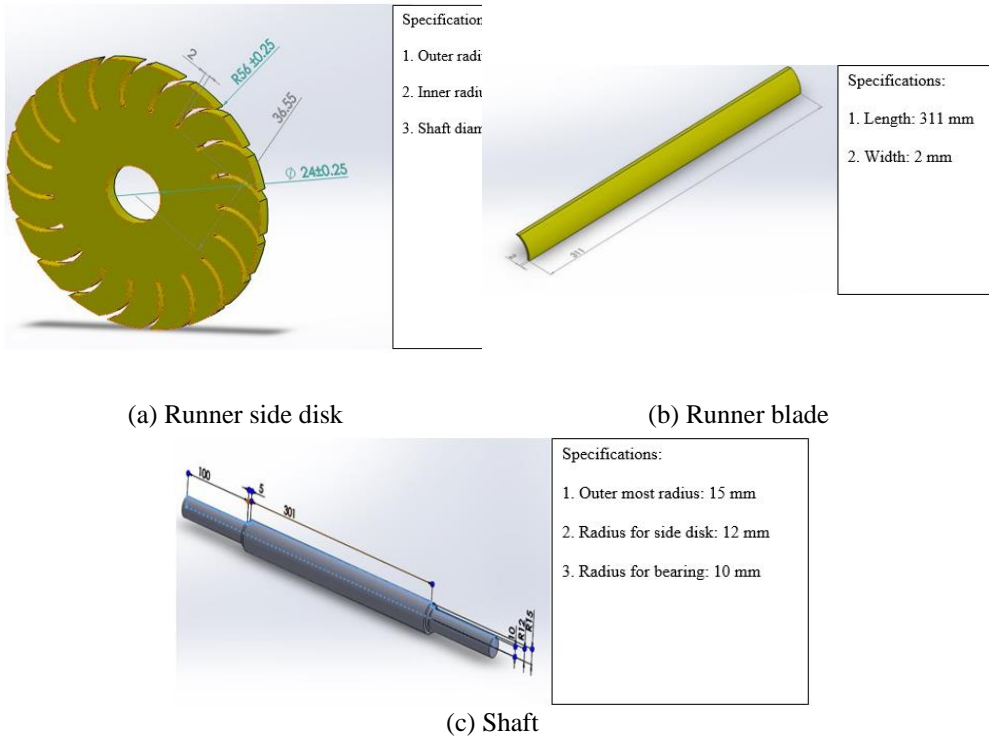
Design of a crossflow turbine and its major components (a) runner side disk, (b) runner blade, (c) shaft.
